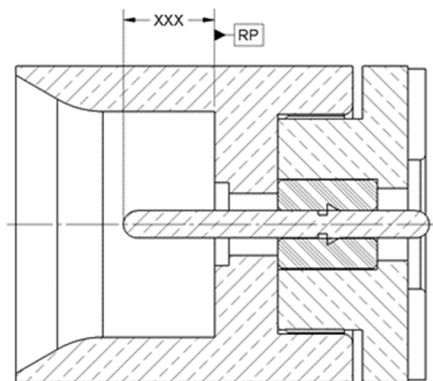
Cross section of SK-3397 (PTFE) showing Mating End Dimension (XXX)
